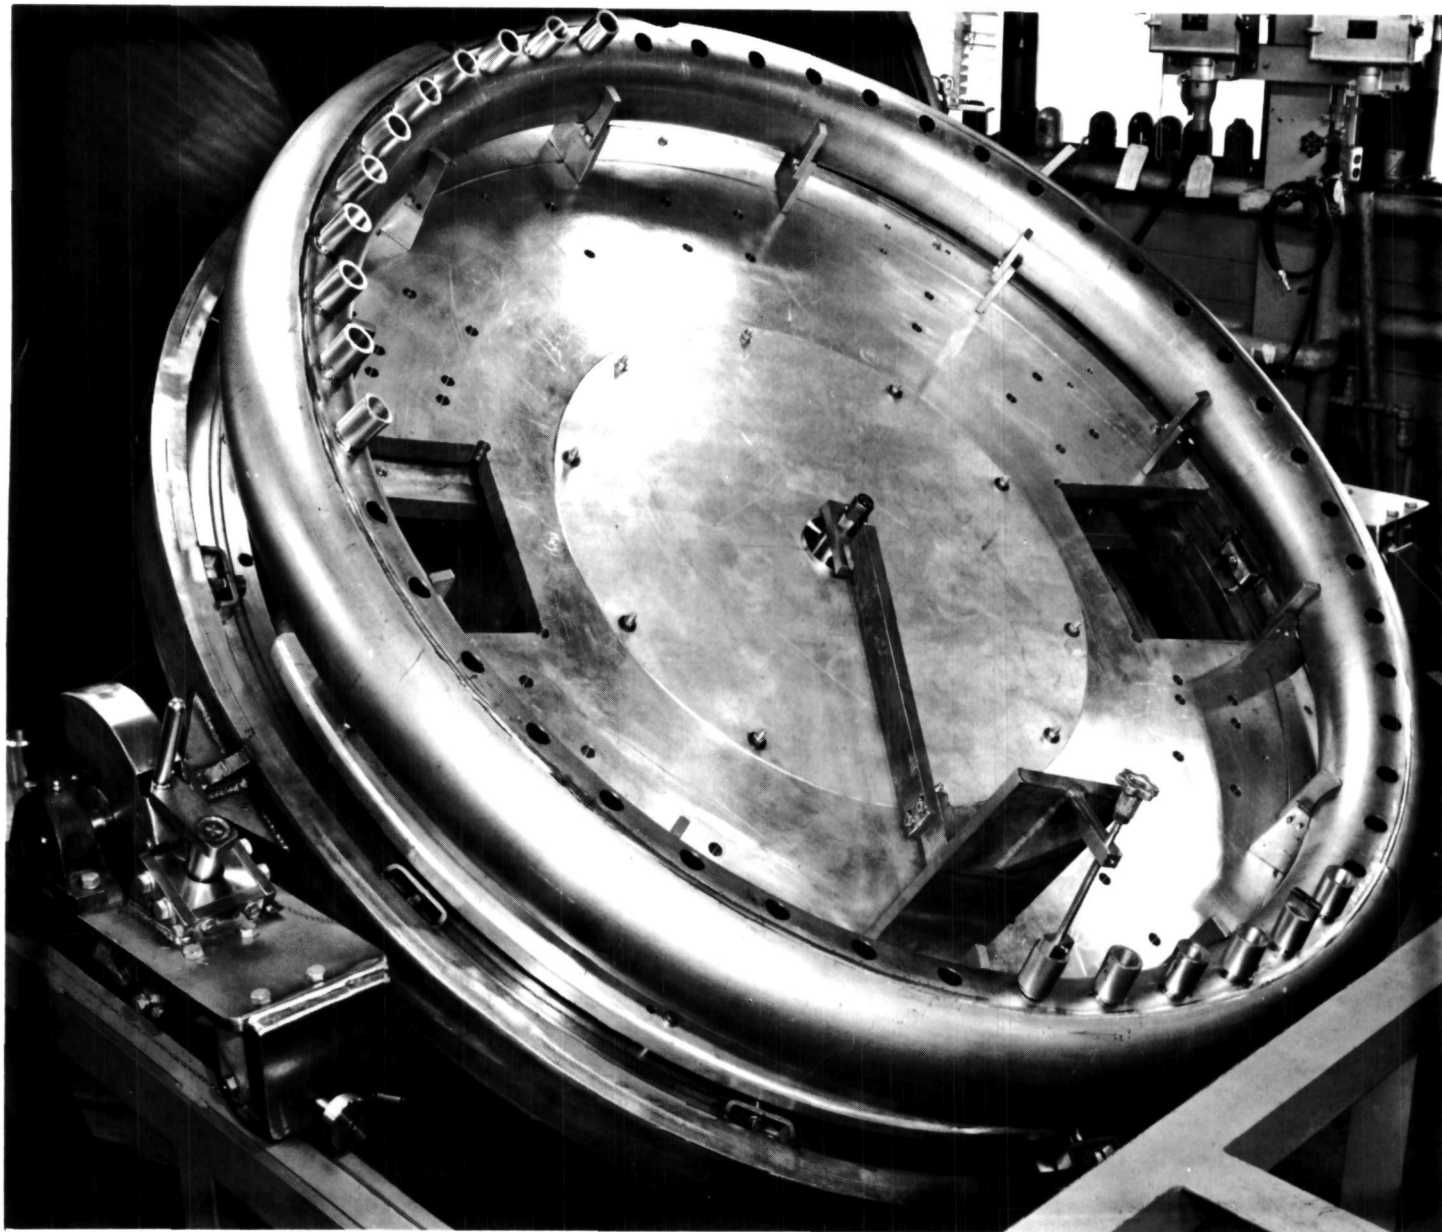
Boss Alignment Fixture Locating a Boss on Inlet Manifold. Other Bosses Shown Have Been Tack Welded.
